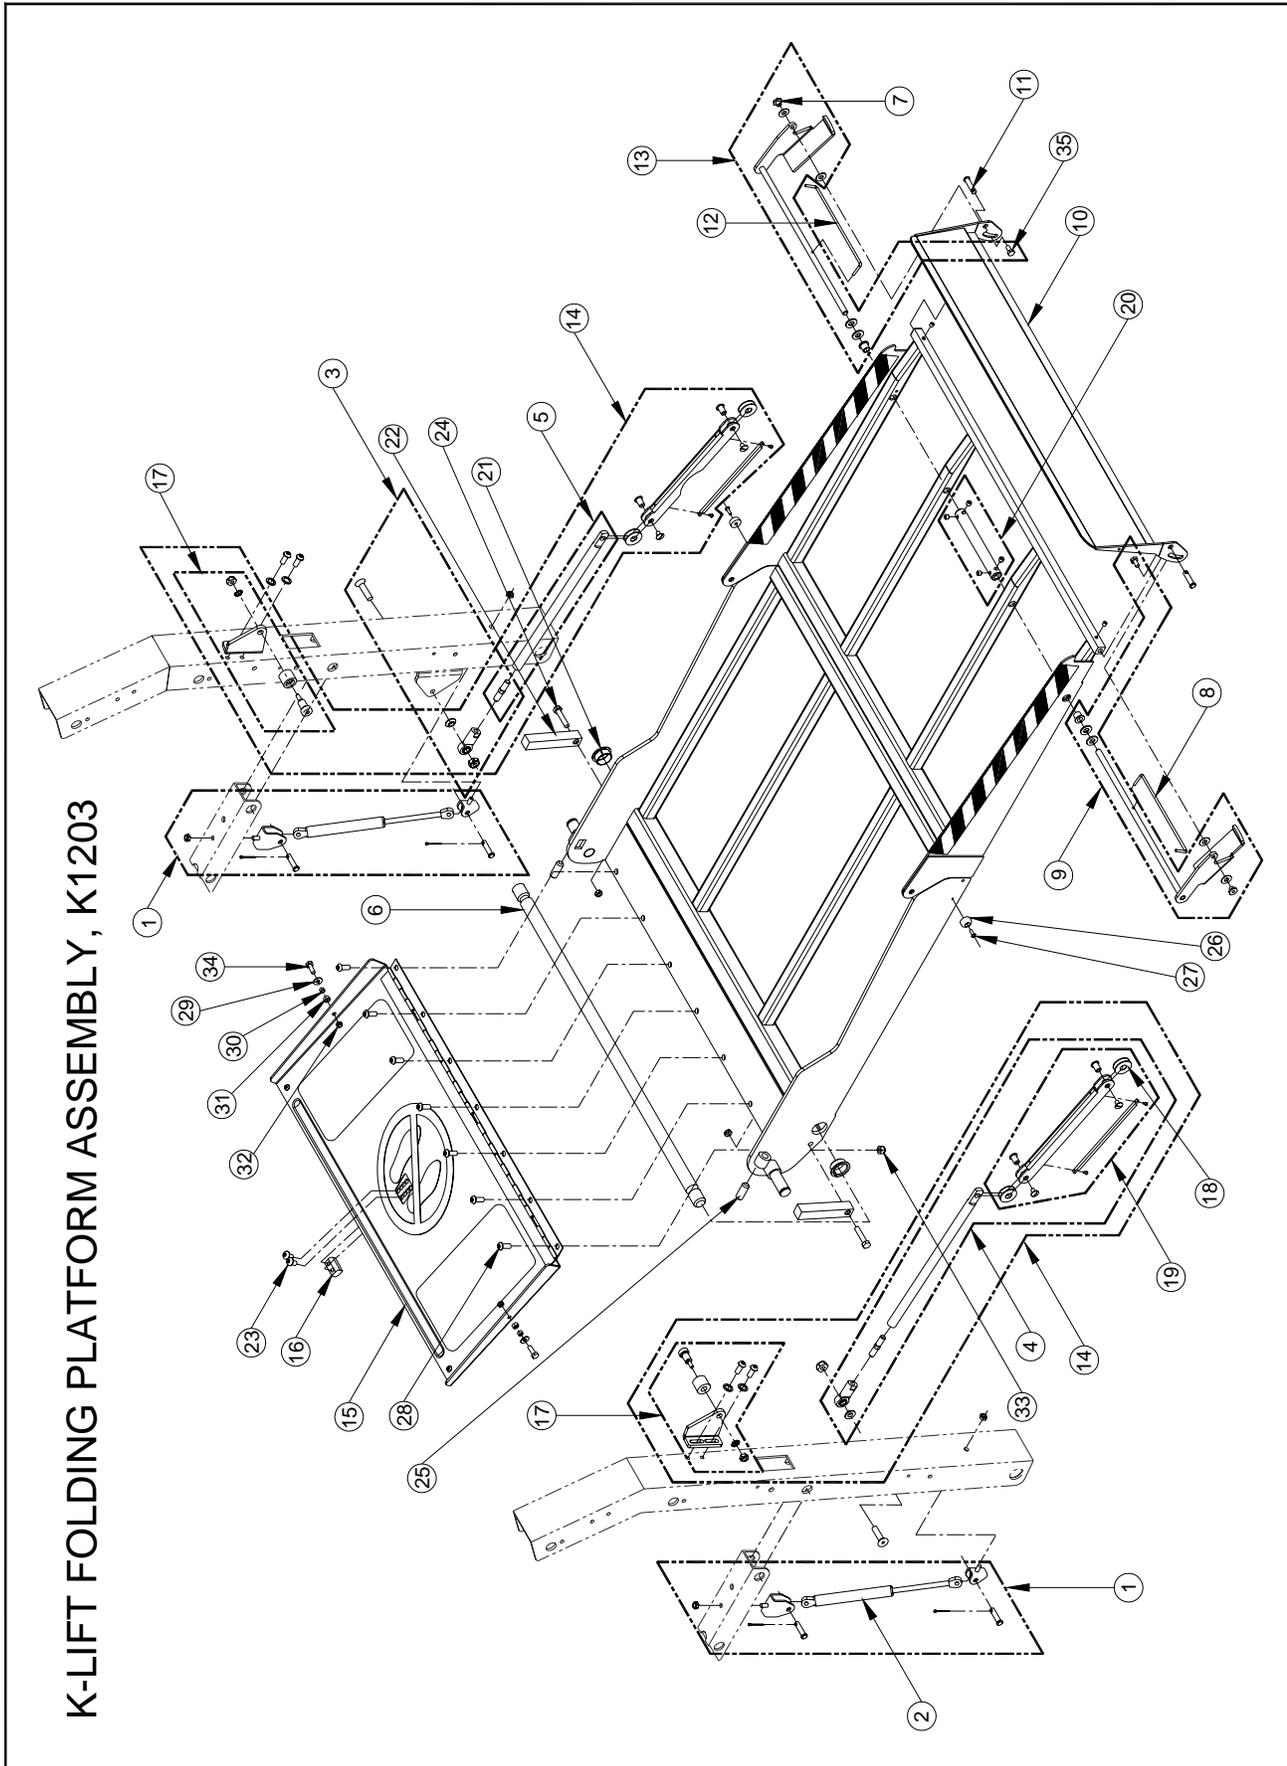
FOLDING PLATFORM ASSEMBLY, K1200
